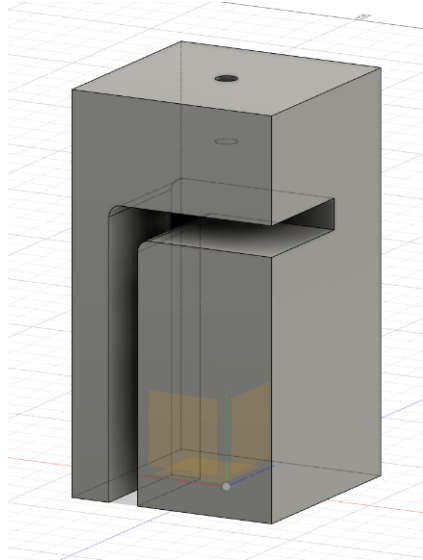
The Structure of Connecting the Motor to the Rod Fixture
